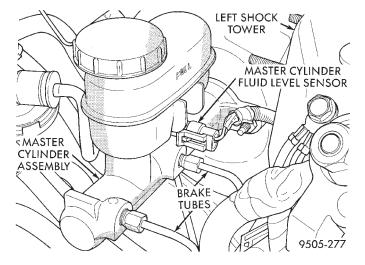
Master Cylinder Brake Fluid Level Sensor
